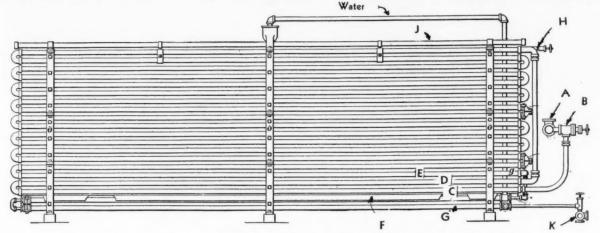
Atmospheric-type condenser with super-heater coils and a liquid cooler.
